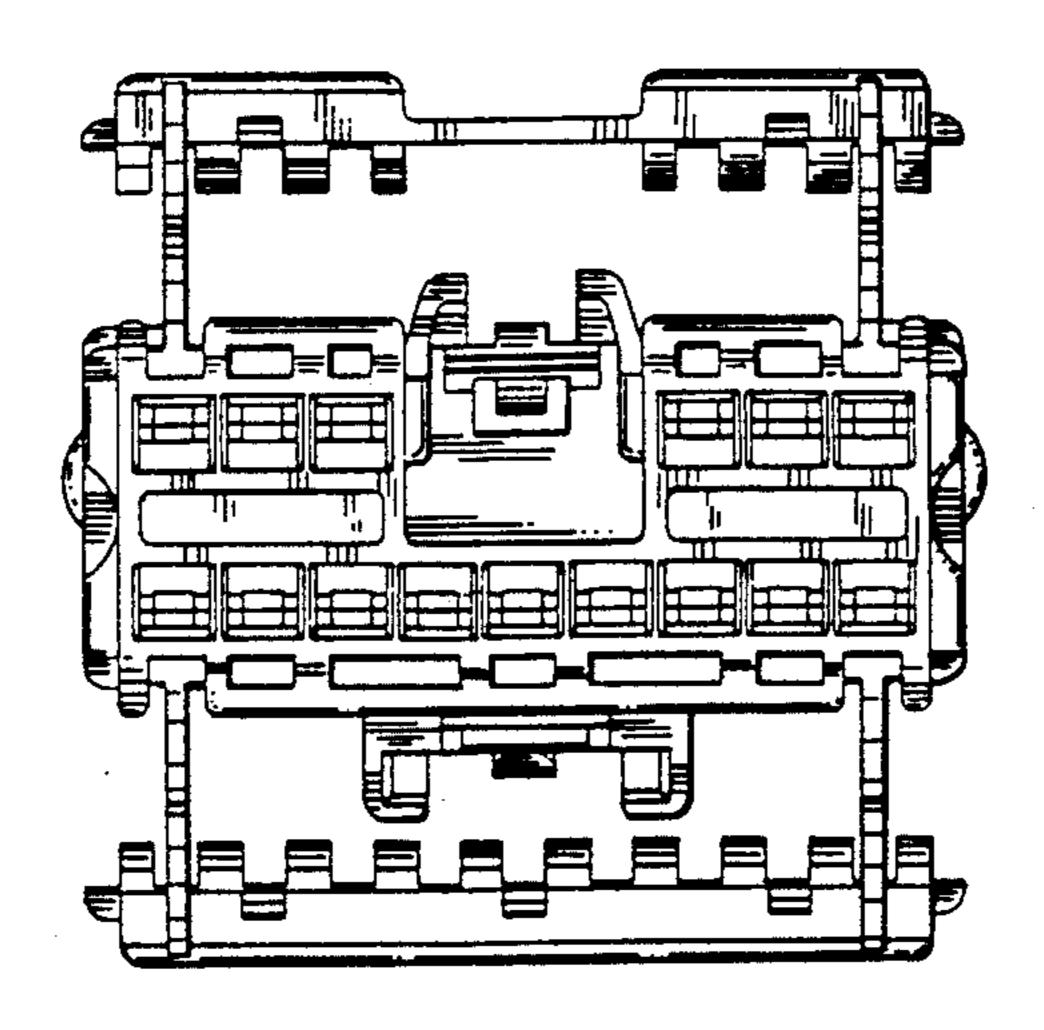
is a cross-sectional view thereof taken on line 6—6 of FIG. 3;
